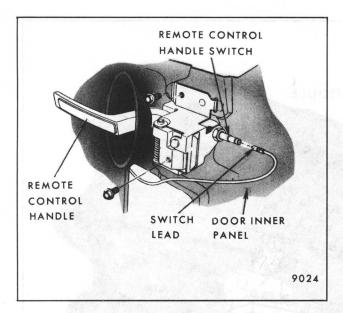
Automatic Door Lock Remote Control Switches (Cadillac Styles)
